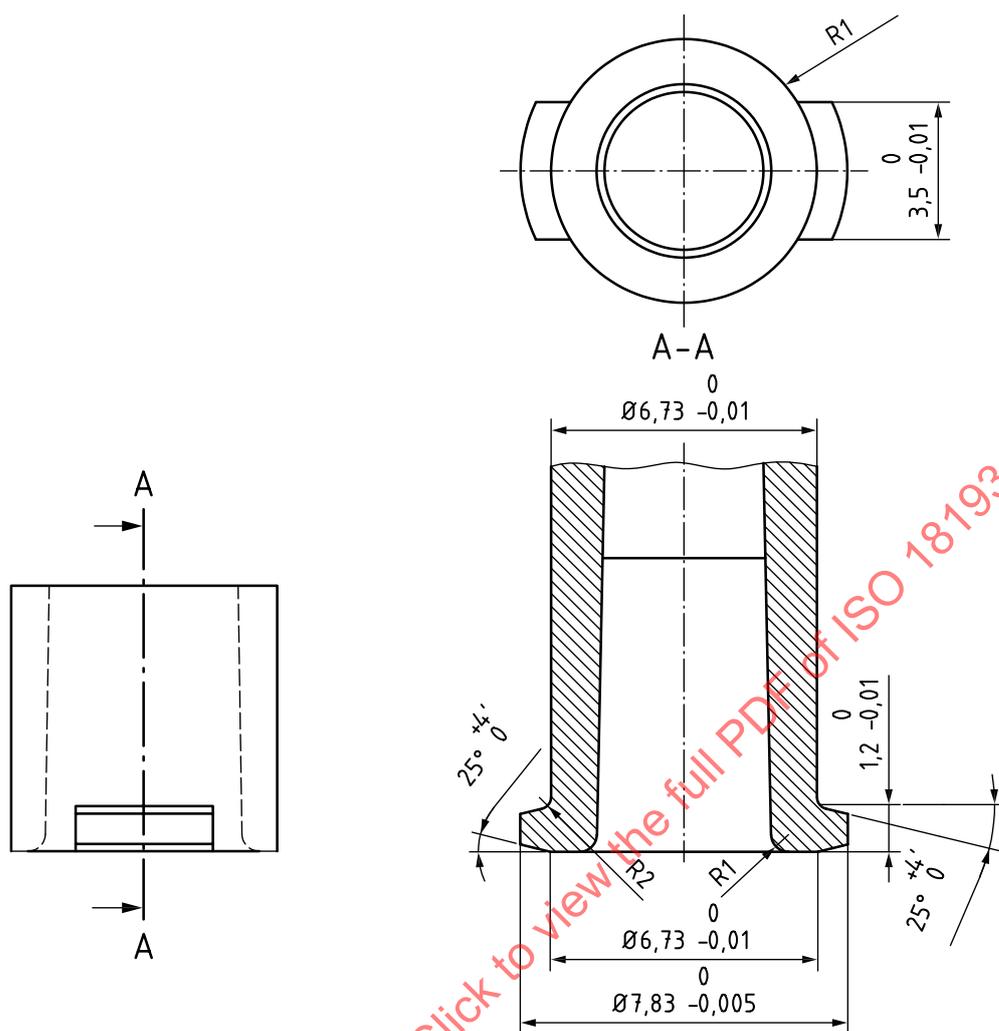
Female 6 % (Luer) lock conical fitting with external thread
